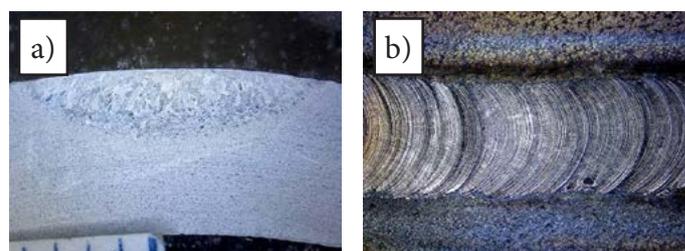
Fusion in nickel alloy 600; current: 160 A: a) fusion macrostructure, b) weld face
